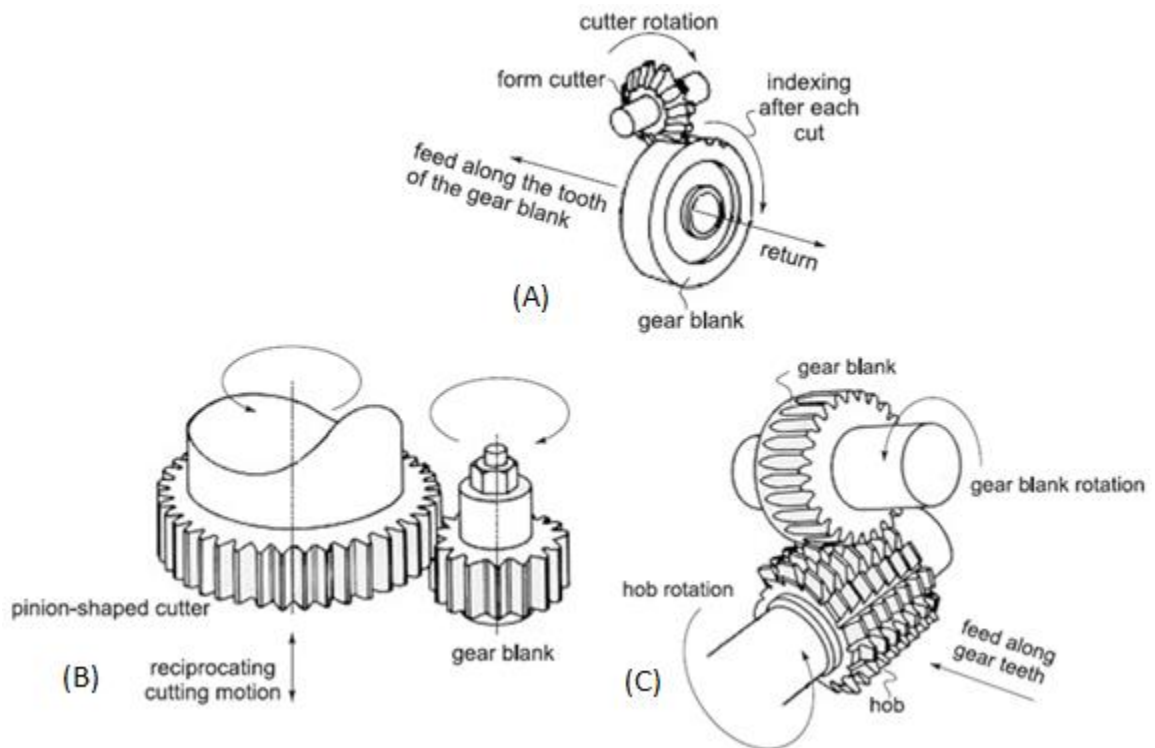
(A) Form milling process; (B) Gear shaping with pinion shaped cutter; (C) Gear hobbing [70].
